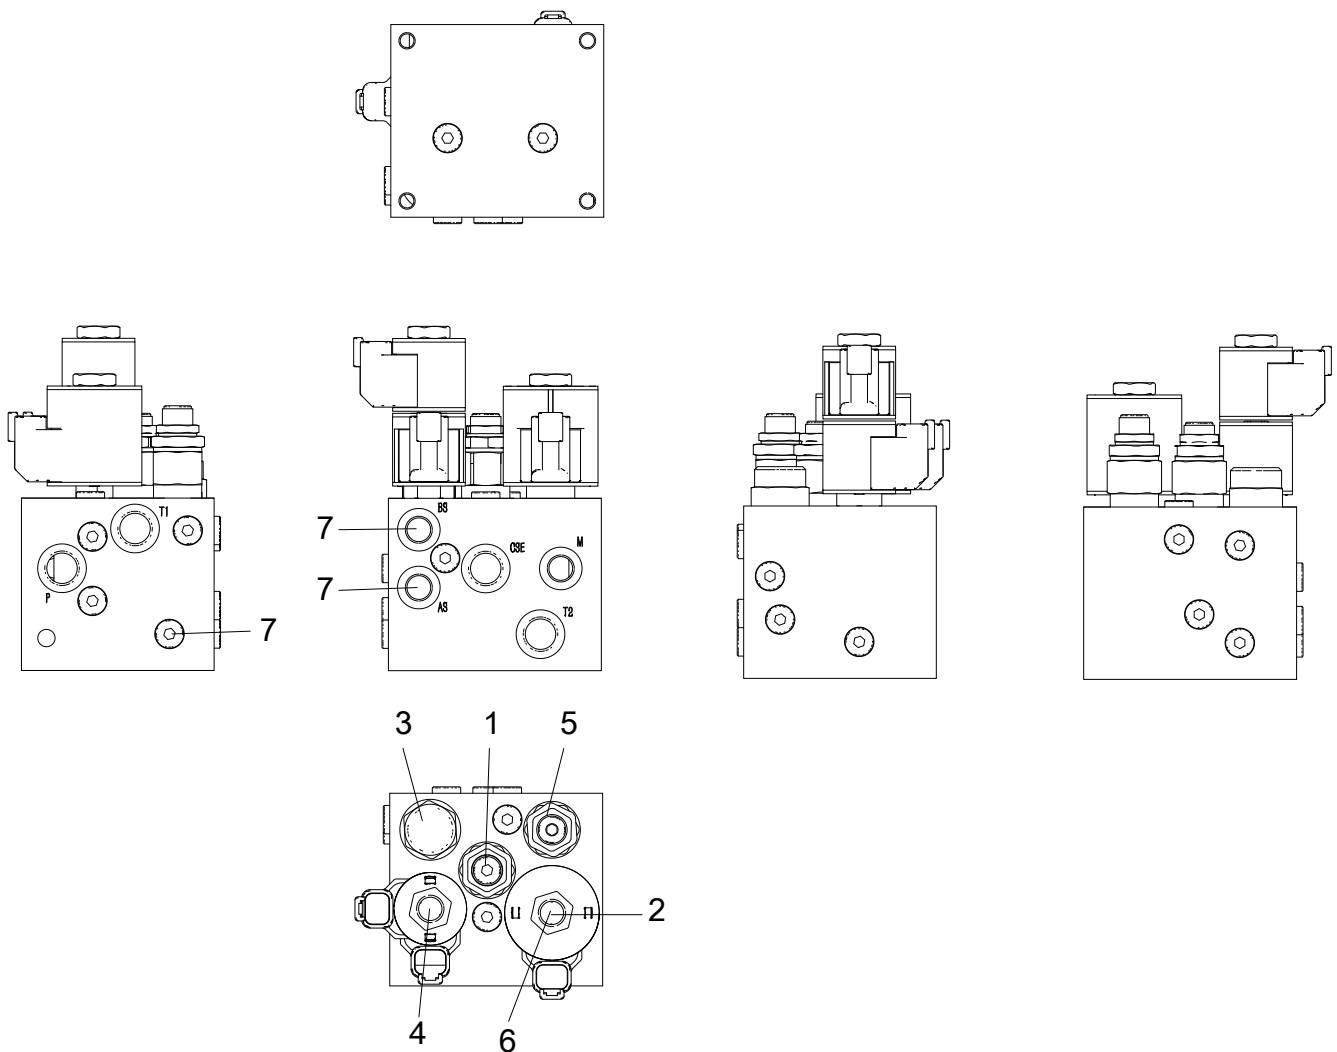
Platform control valve (PN.202040003322)/(PN.202040003049)
